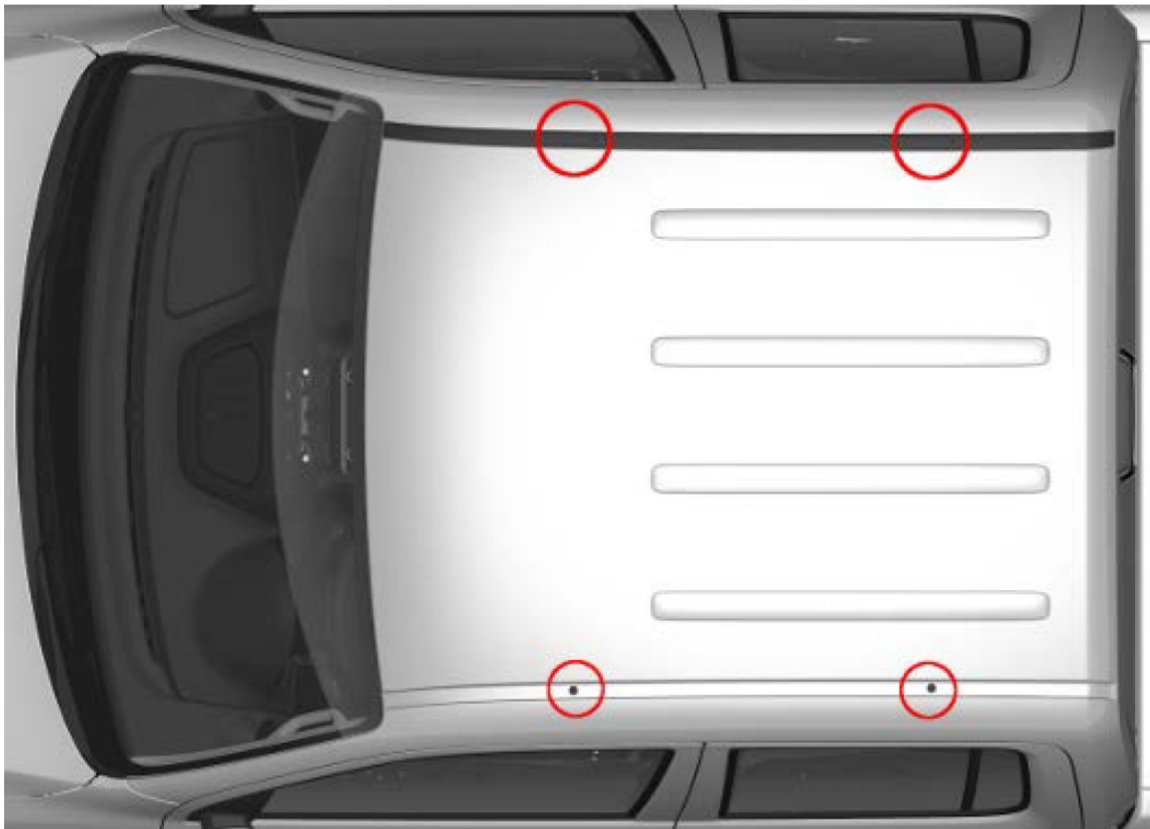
Roof rack bolt attachment points on AMAROK DC (marked in red)
